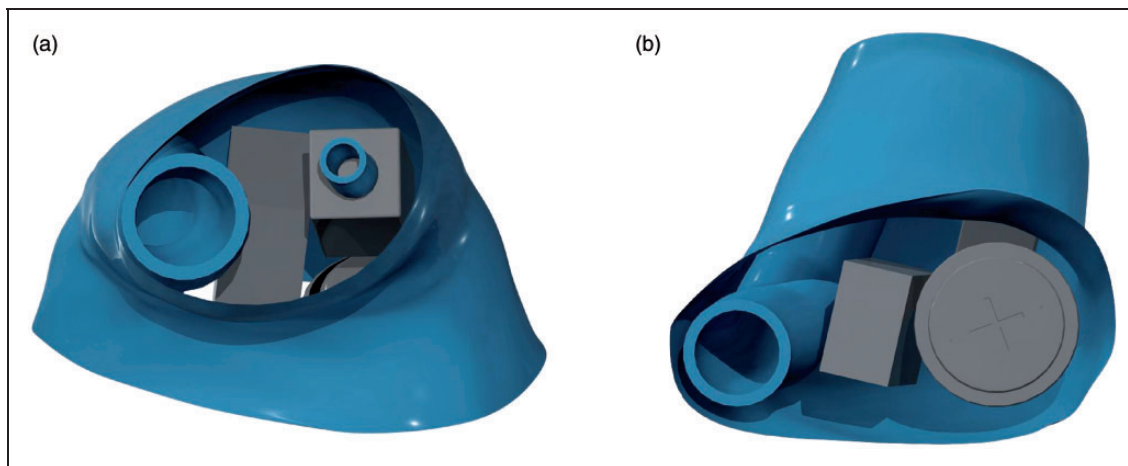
Views of the (a) top and (b) bottom of the hearing aid model B with the base and end plates removed.
